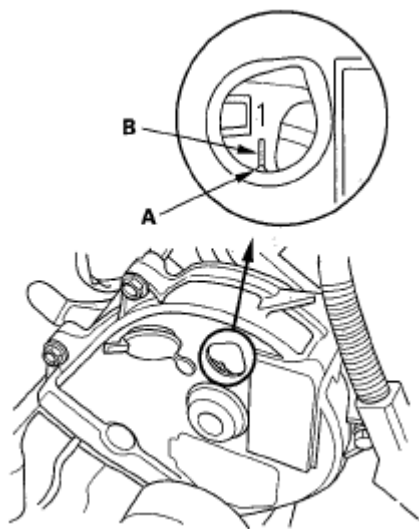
Identifying Front Upper Cover With No. 1 Piston TDC Mark
